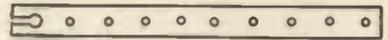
The Spindles should have Holes drilled in them as shown.
